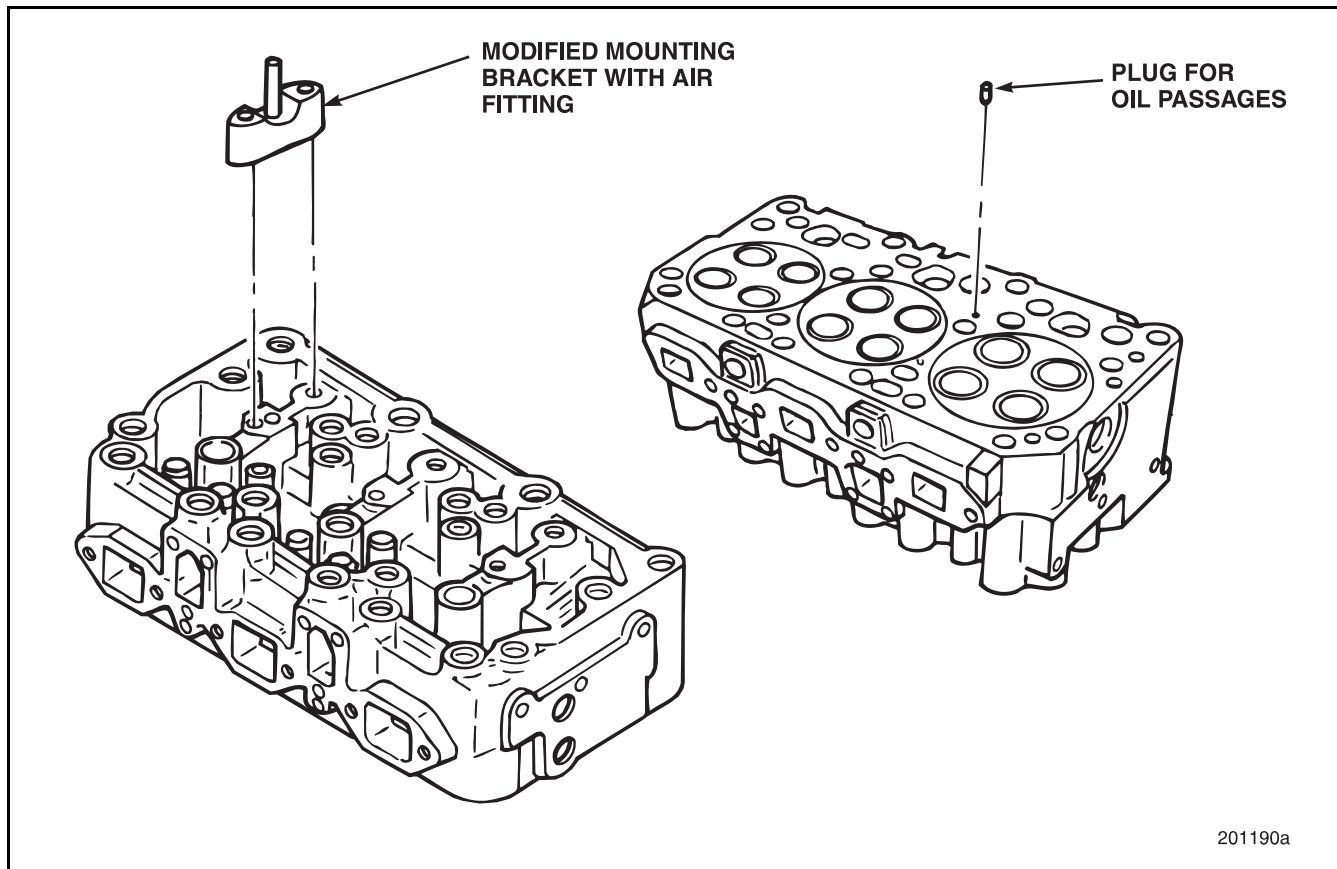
Cylinder Head Oil Passage Leak Check (Out of Chassis)
